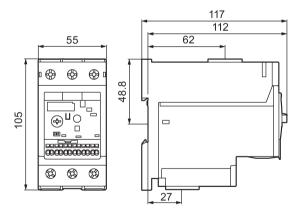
3RB3.3.-..D0 and 3RU2936-3AA01
